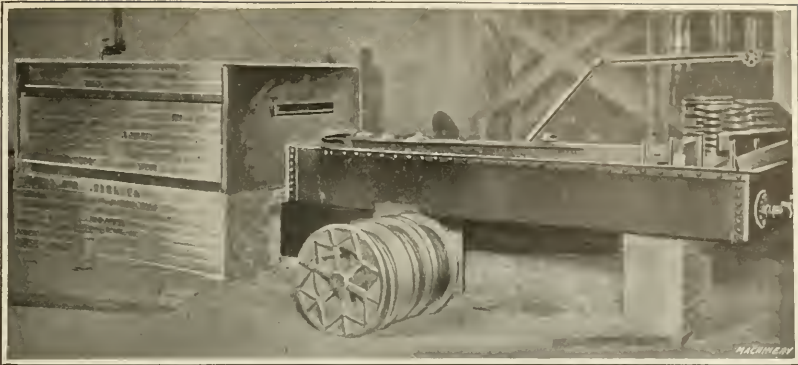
Heating and Quenching Baths for hardening Strip Steel
